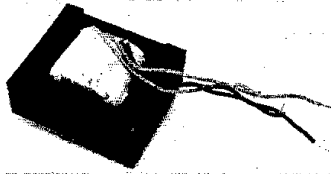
Transformer reassembled and awaiting the bell housing.
